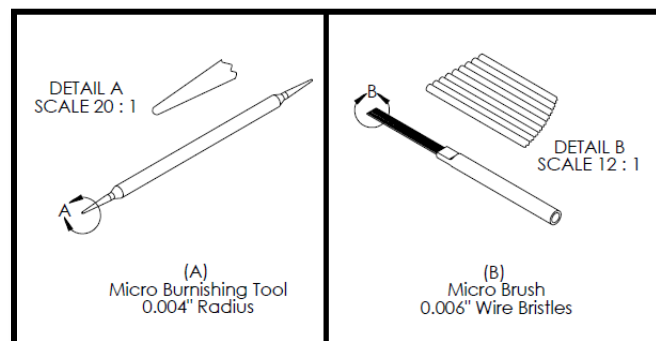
(a) Micro Burnishing Tool, and (b) Micro Wire Brush
